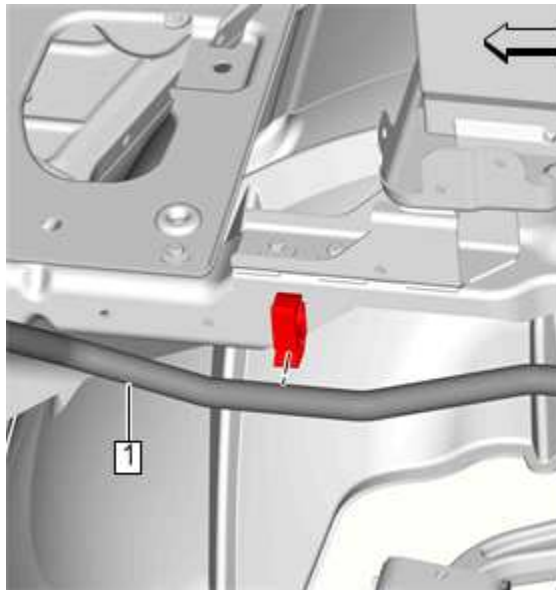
Air Conditioning Compressor Hose At Air Cleaner Bracket
